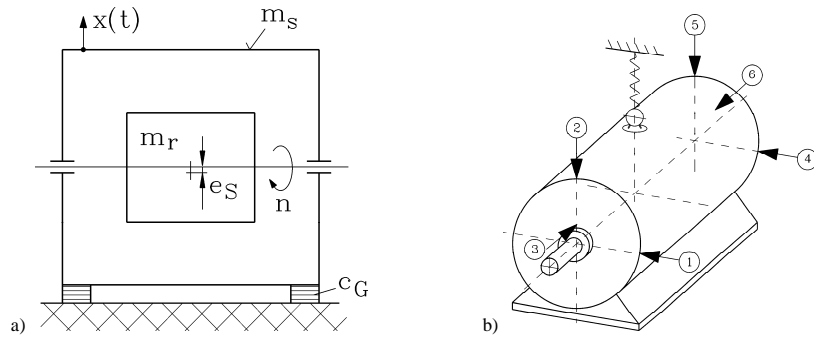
Vibration measurement for completed motor: a) motor put on rubber pads, b) motor hung in springs
